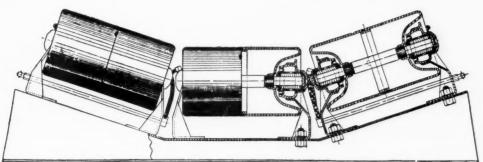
A three-pulley conveyor idler equipped with flexible roller bearings.
